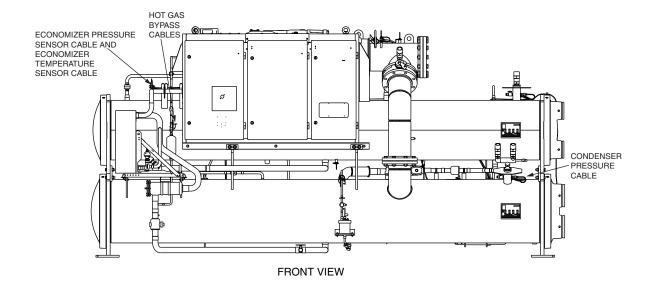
Electrical Cable Routing (Unit with R Compressor Shown)
